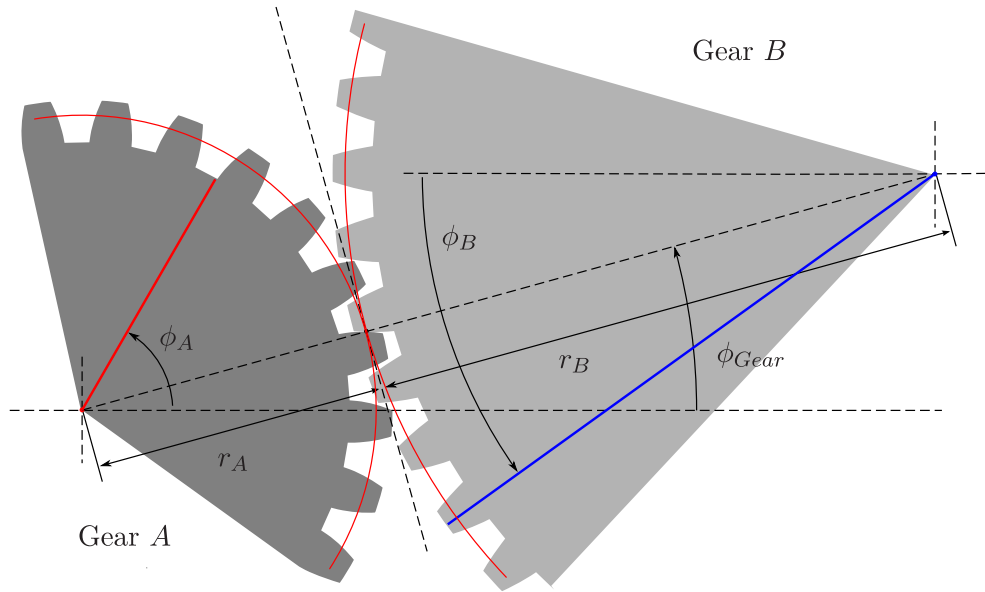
Schematic overview of two gearwheels in contact. The blue and red line are fixed markers on the gear wheels. In the figure $\dot{\phi}_A > 0$ and Gear A drives Gear B.
